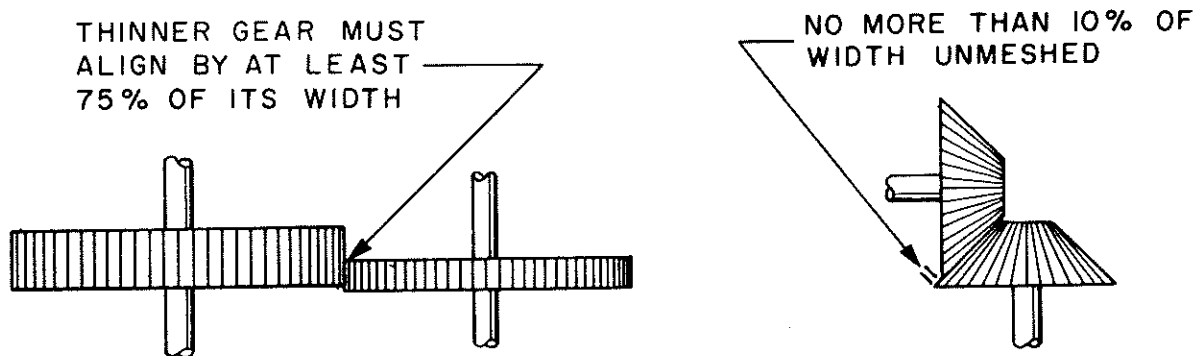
Alignment Limits for Spur Gears and for Bevel Gears
